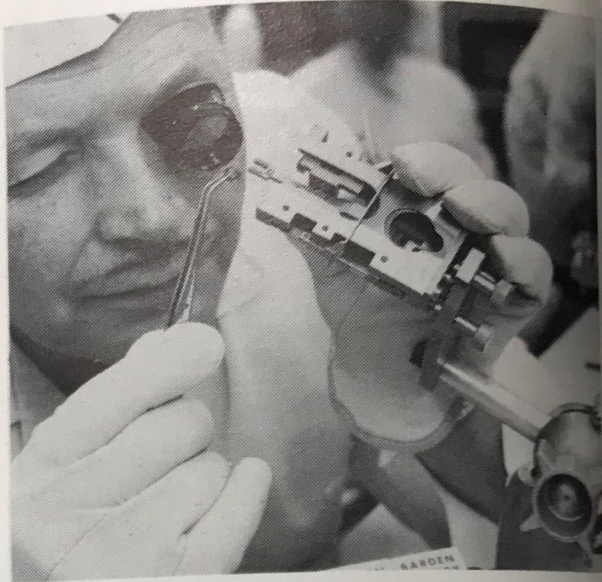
Installing a bearing in force-balance Mach transducer. Bearing which is first degreased for inspection purposes, has been regreased with a known amount of lubricant.
